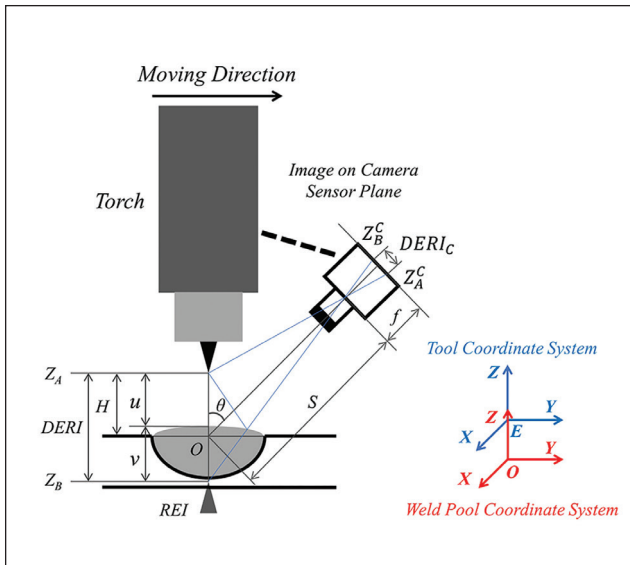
The diagram of the passive vision welding monitoring system and defined tool and weld pool coordinate system.
